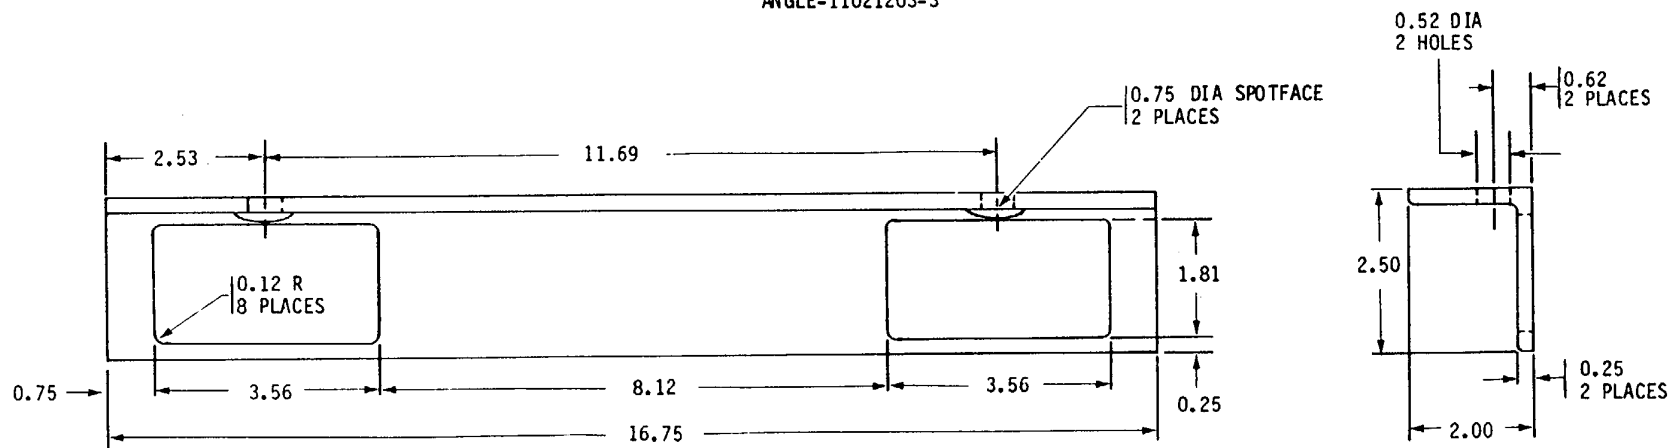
Dimensions for cabinet roller assembly, 11021203, unit 2, ISO-2-1.
